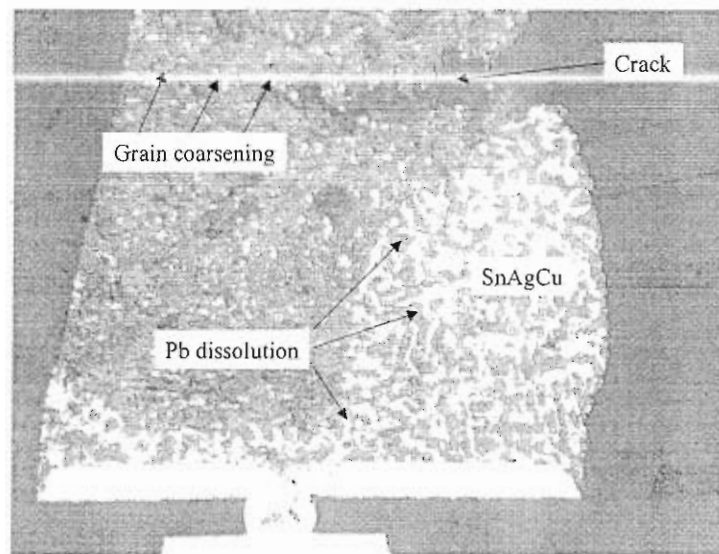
1657 I/O CCGA high-lead solder column on a microvia pad PWB with Sn-Ag-Cu solder joints (Courtesy of Dr. D. Shangguan/T. Castello)
